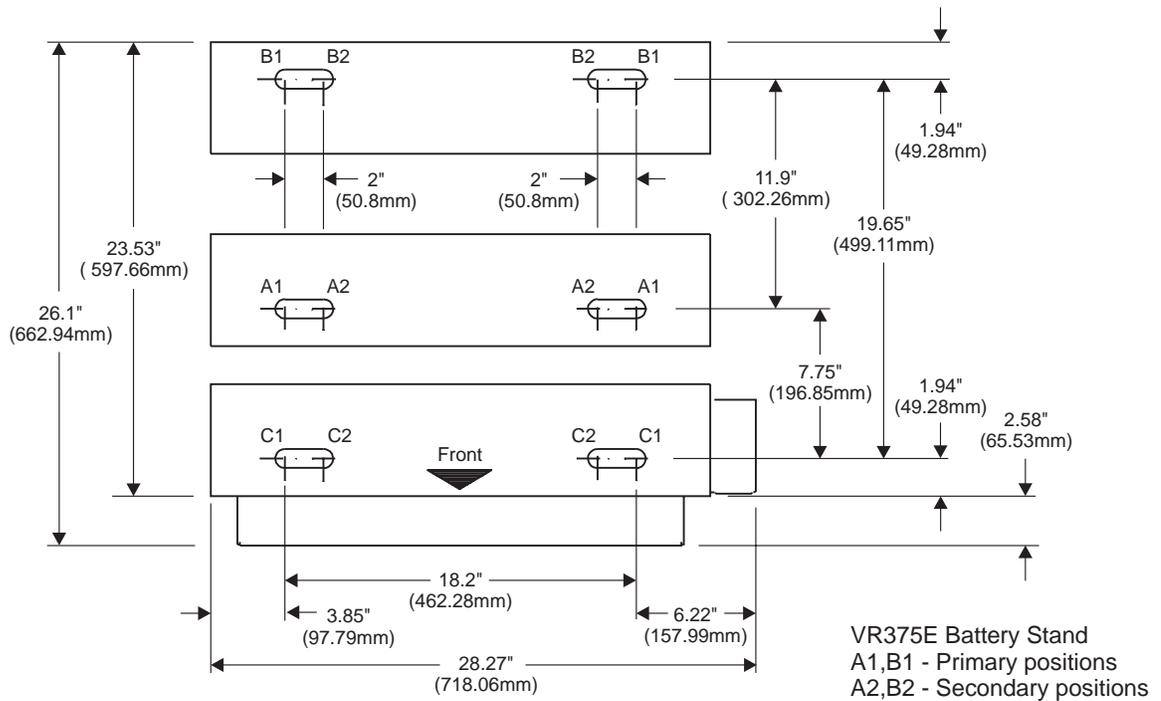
D: VR375E Battery Stand Mounting Footprint
